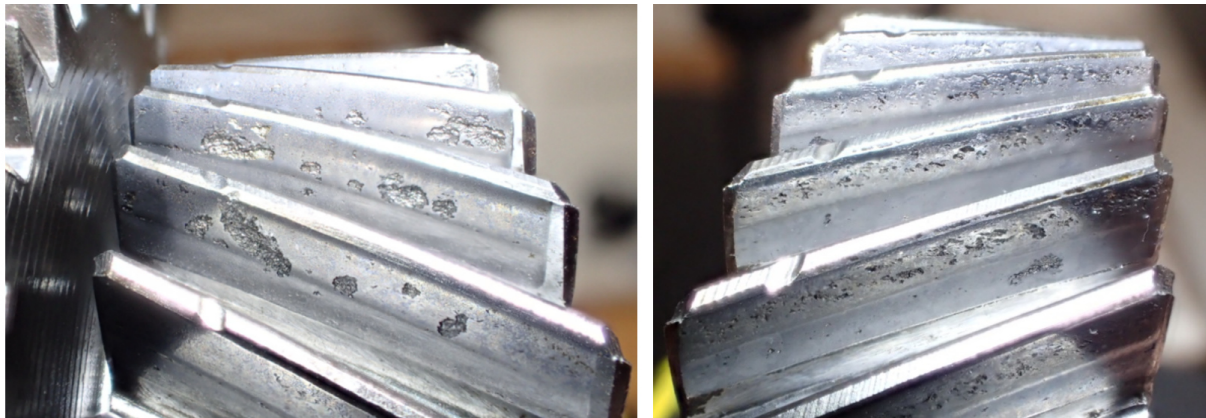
Pitting on PM HIP:ed gearset 1 of 3rd speed (pinion left) - after 412 hours. Pitting has been detected already after 115 hours (Figure 7-13).
